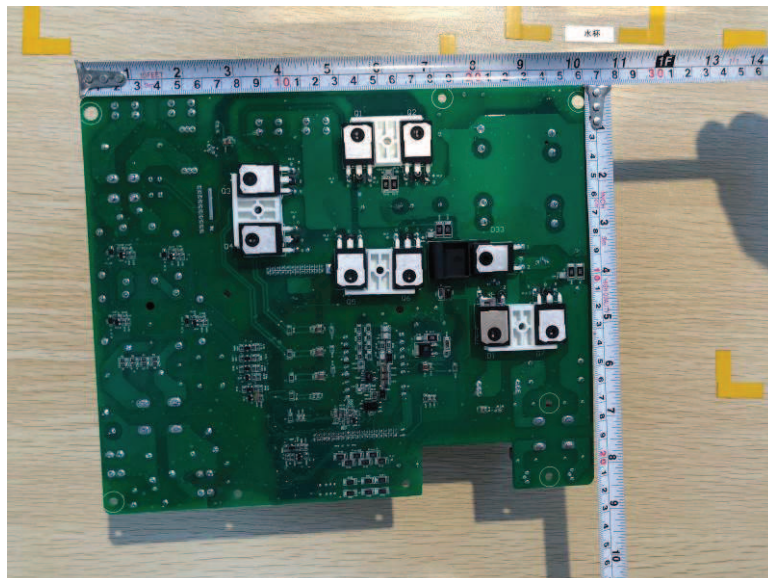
Solder side view of Main board for model: EA2KSI, EA2.5KSI, EA3KSI
